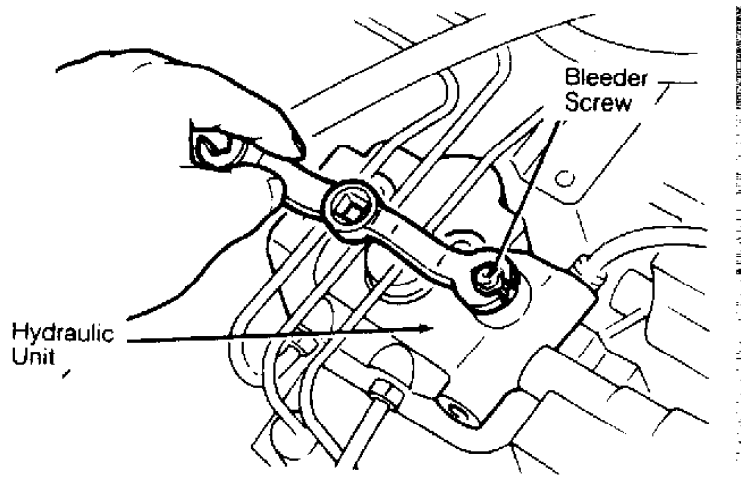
Locating Hydraulic Unit Bleeder Screw
